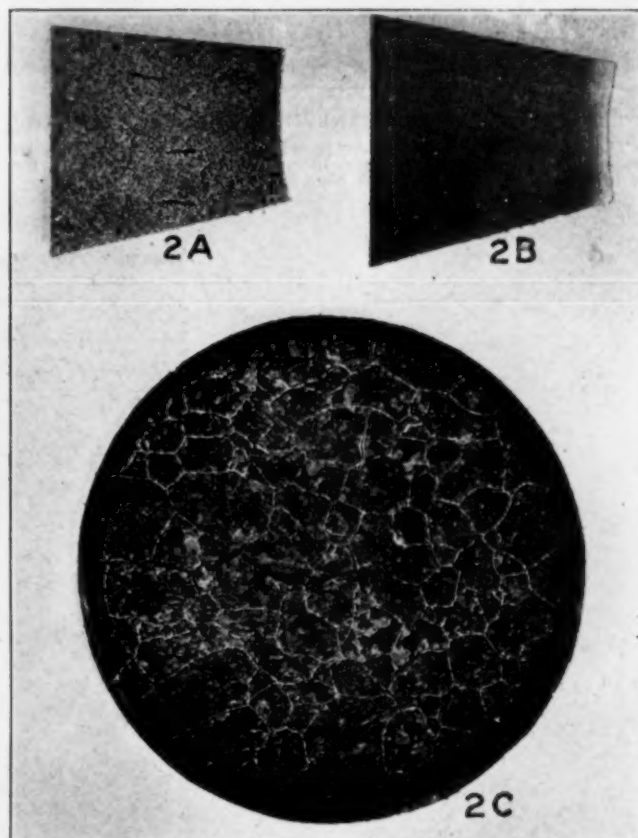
DEFECTS IN GUN FORGINGS REVEALED BY DEEP ETCHING
